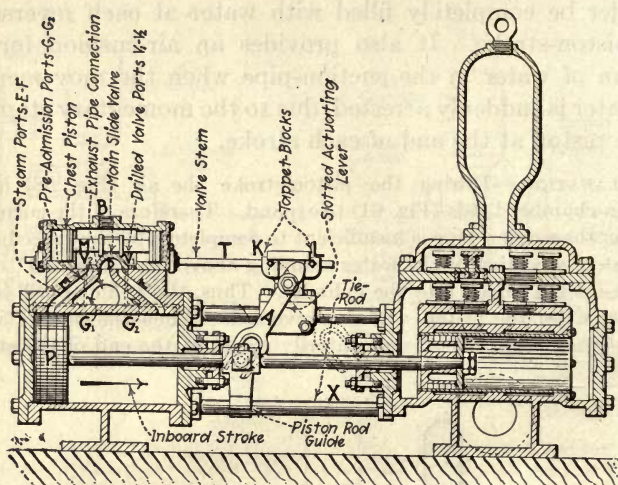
Longitudinal Sectional Elevation Of Burnham Direct-Acting Simplex Steam-Pump.
